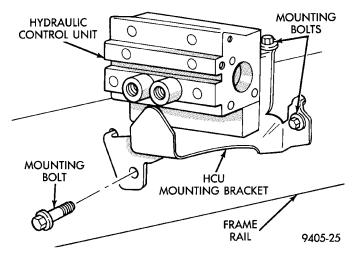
Hydraulic Control Unit Mounting Bracket INSTALL
